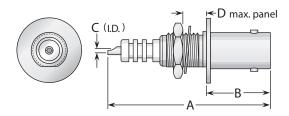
(Bulkhead jack receptacle, front mount, no mounting gasket)
